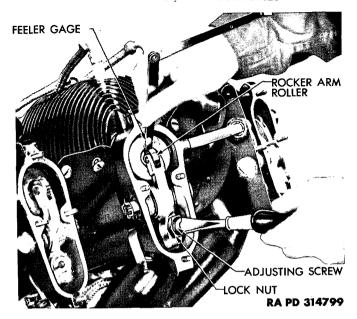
Adjusting Valve Clearance Using Gage 41-G-412-75
